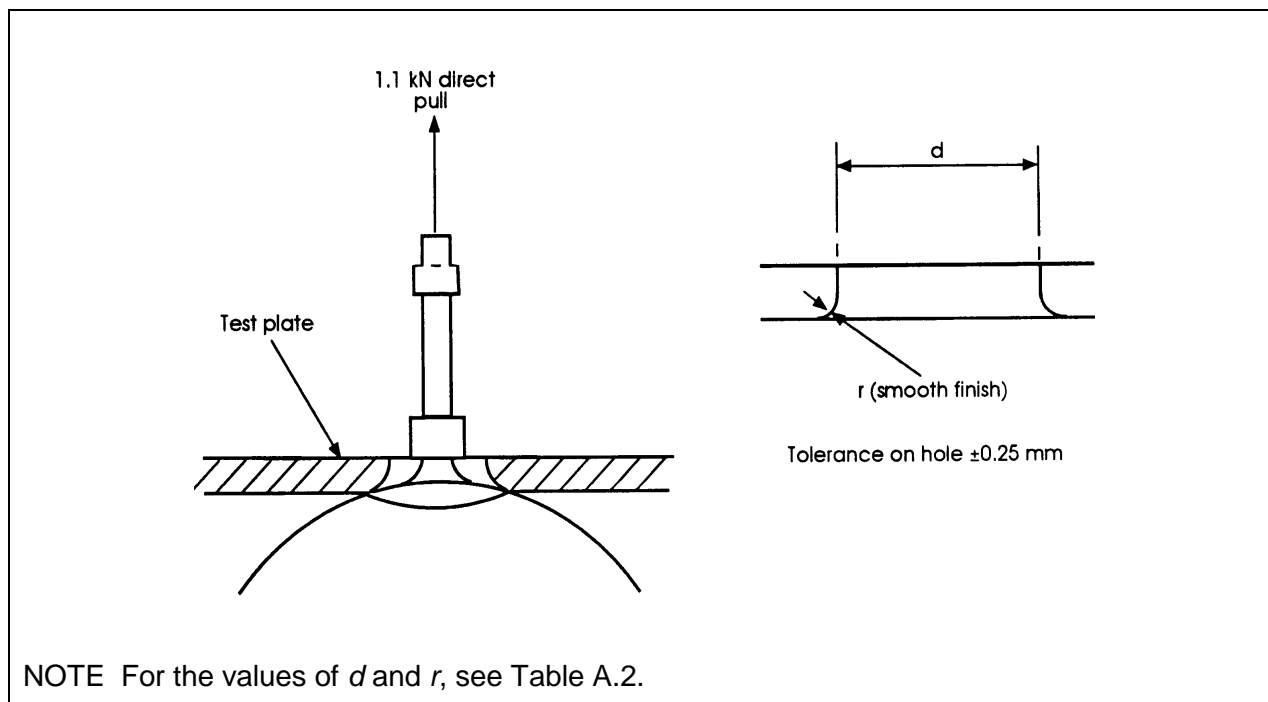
Assembly of test plate for direct pull and test plate dimension
